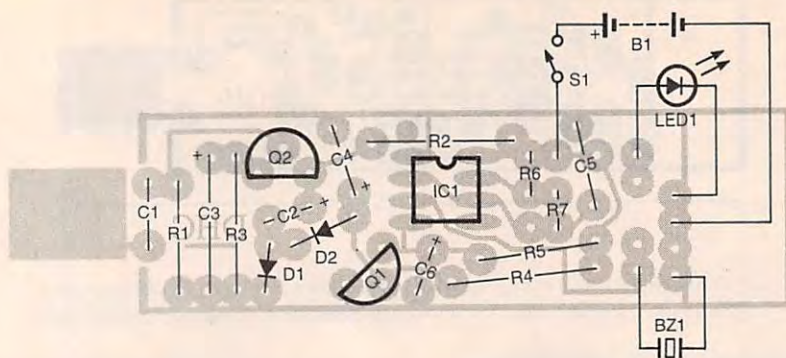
All of the components for the Electrostatic Voltage Probe fit neatly on a small single-sided PC board. Several resistors are mounted vertically to save space. Note the large foil pad next to C1. That pad is the probe—neatly designed into the board layout!
